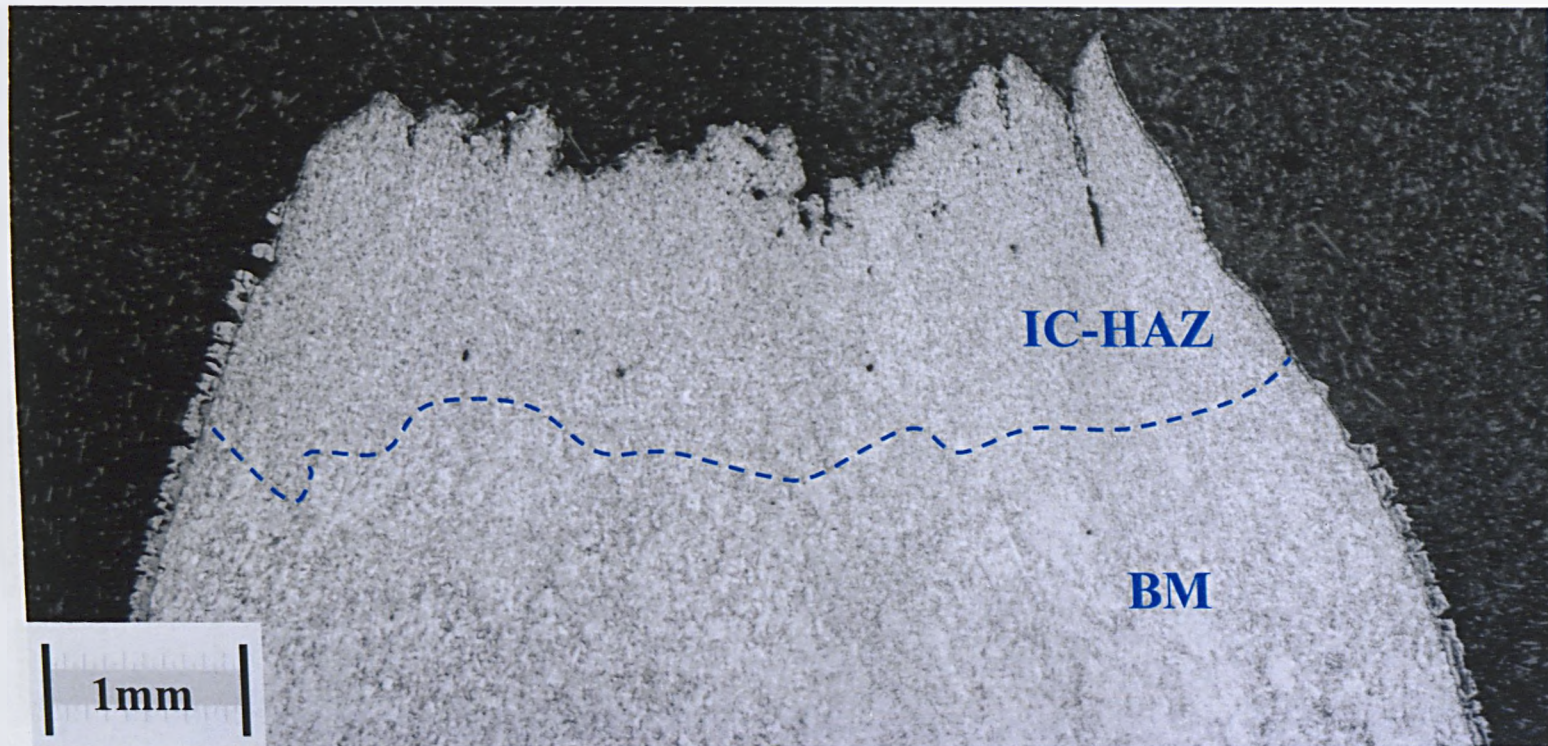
The same welded joint: Less cavitation at the surface layer. Similar to the decarburised layer of samples tested in hydrogen.
